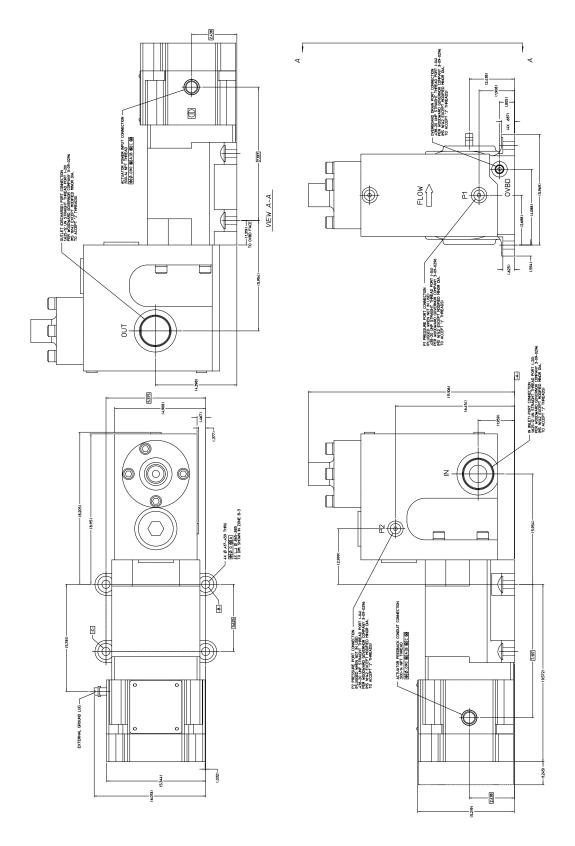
LQ25T Outline Drawing - Single Resolver
